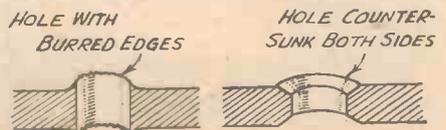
How to finish the edges of holes drilled in sheet metal.
